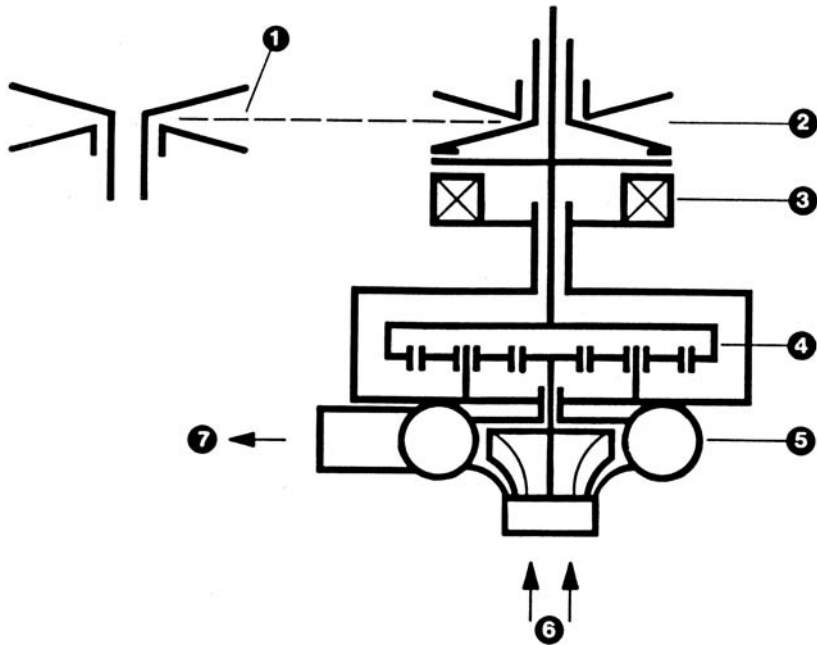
Schematic of centrifugal supercharger installation: 1, primary pulley for V-belt drive on engine crankshaft; 2, secondary pulley on turbocharger; 3, electromagnetic clutch; 4, planetary step-up gears; 5, centrifugal compressor; 6, air inlet; 7, air discharge. (Courtesy Zahnradfabrik Friedrichshafen AG.)
